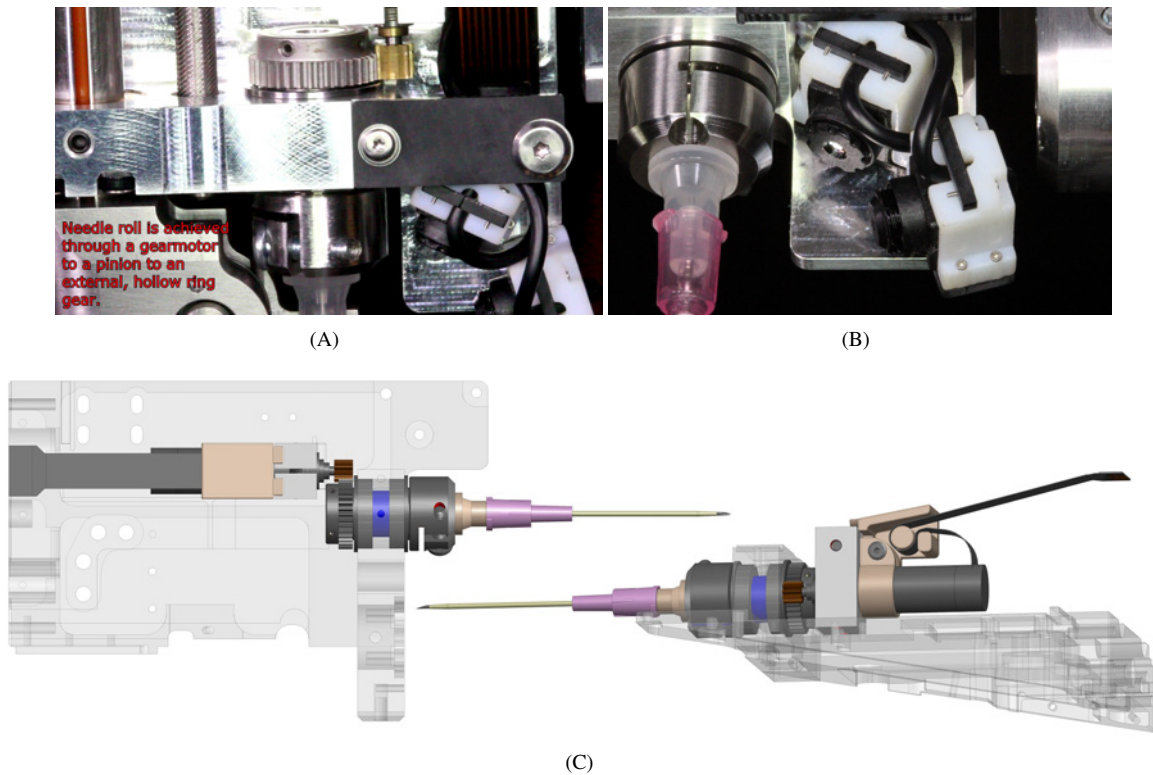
Needle-Holder and Roll DOF Details. Both were hollow to permit the targeting-laser to pass.
